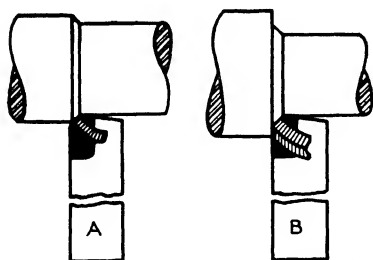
A 45-deg. cutting edge is satisfactory for finishing cuts but should be long enough to take the full depth as at A.
